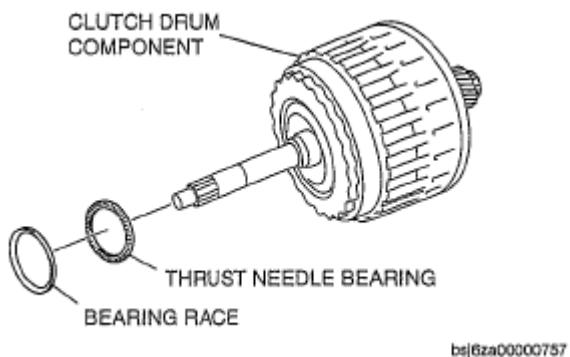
Identifying Thrust Needle Bearing And Bearing Race
